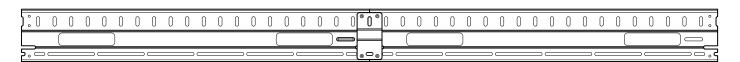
Wallplate for SB 33 A 82-90, and 90-100 Models After Assembly
